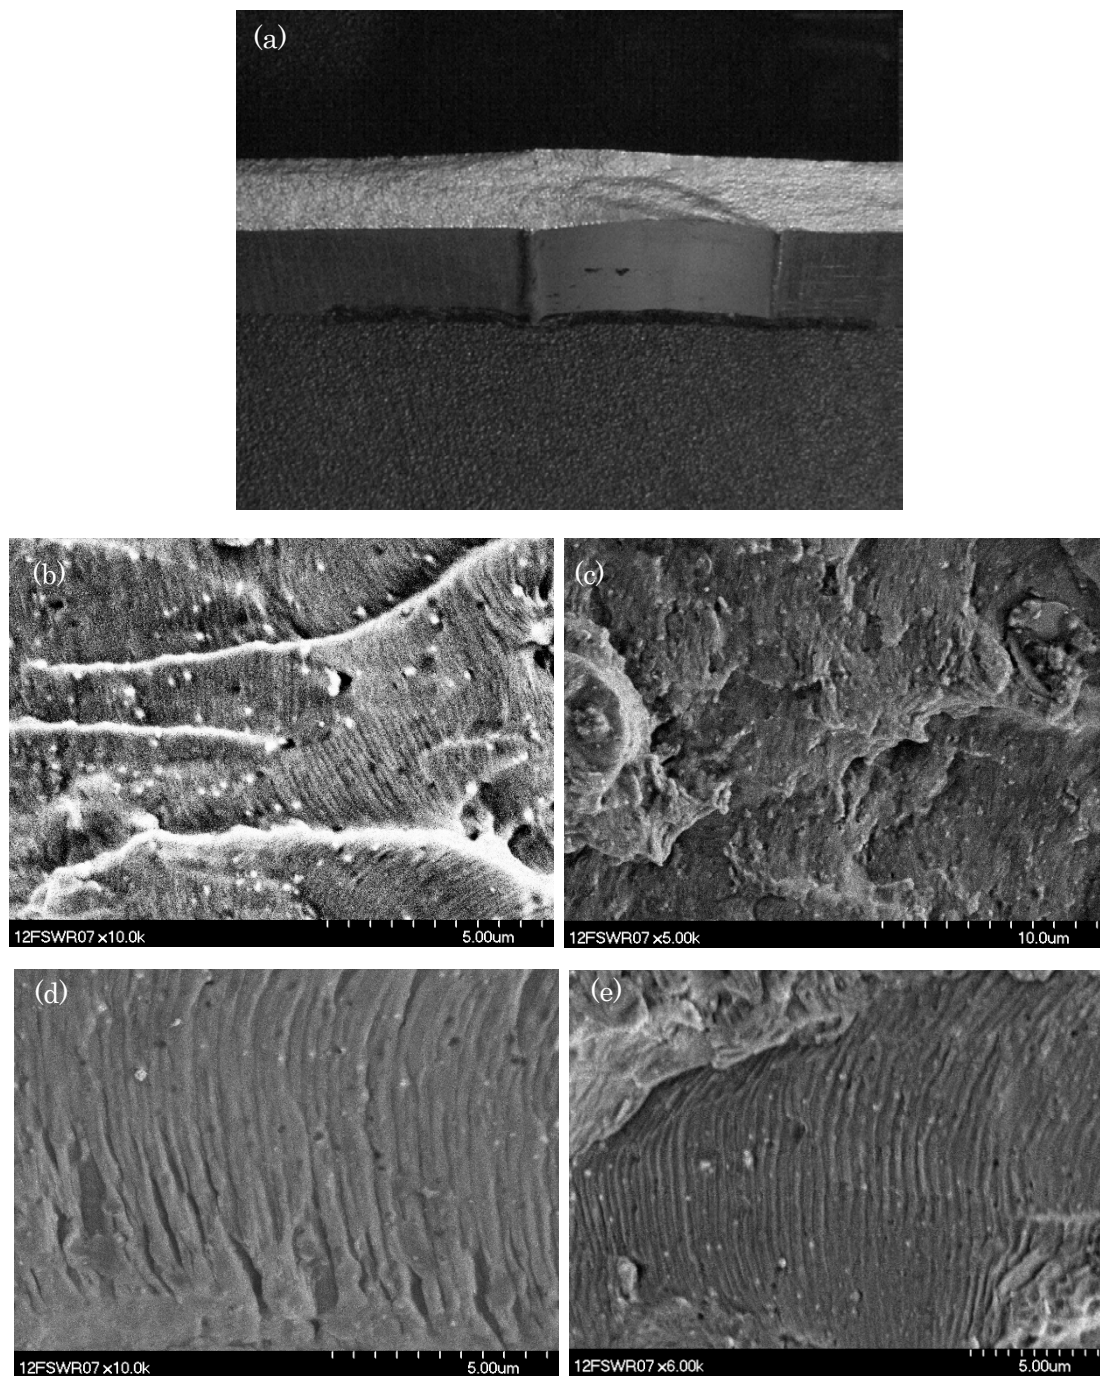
Fracture surface observation of FSW joint ( $R=0.7$ ,  $L=10$ ) (a) Fracture surface, (b) BM, (c) SZ, (d) HAZ, (e) BM
